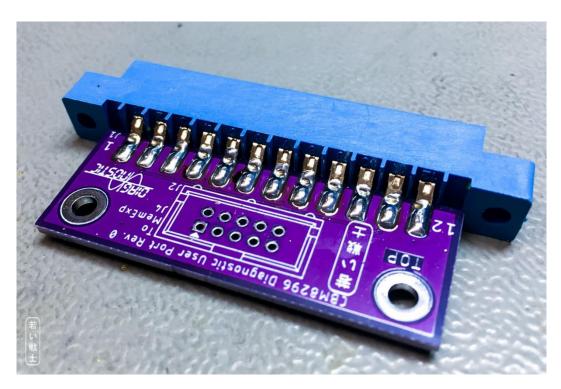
Step 3: The top latches are solder to the solder pads on the top side
